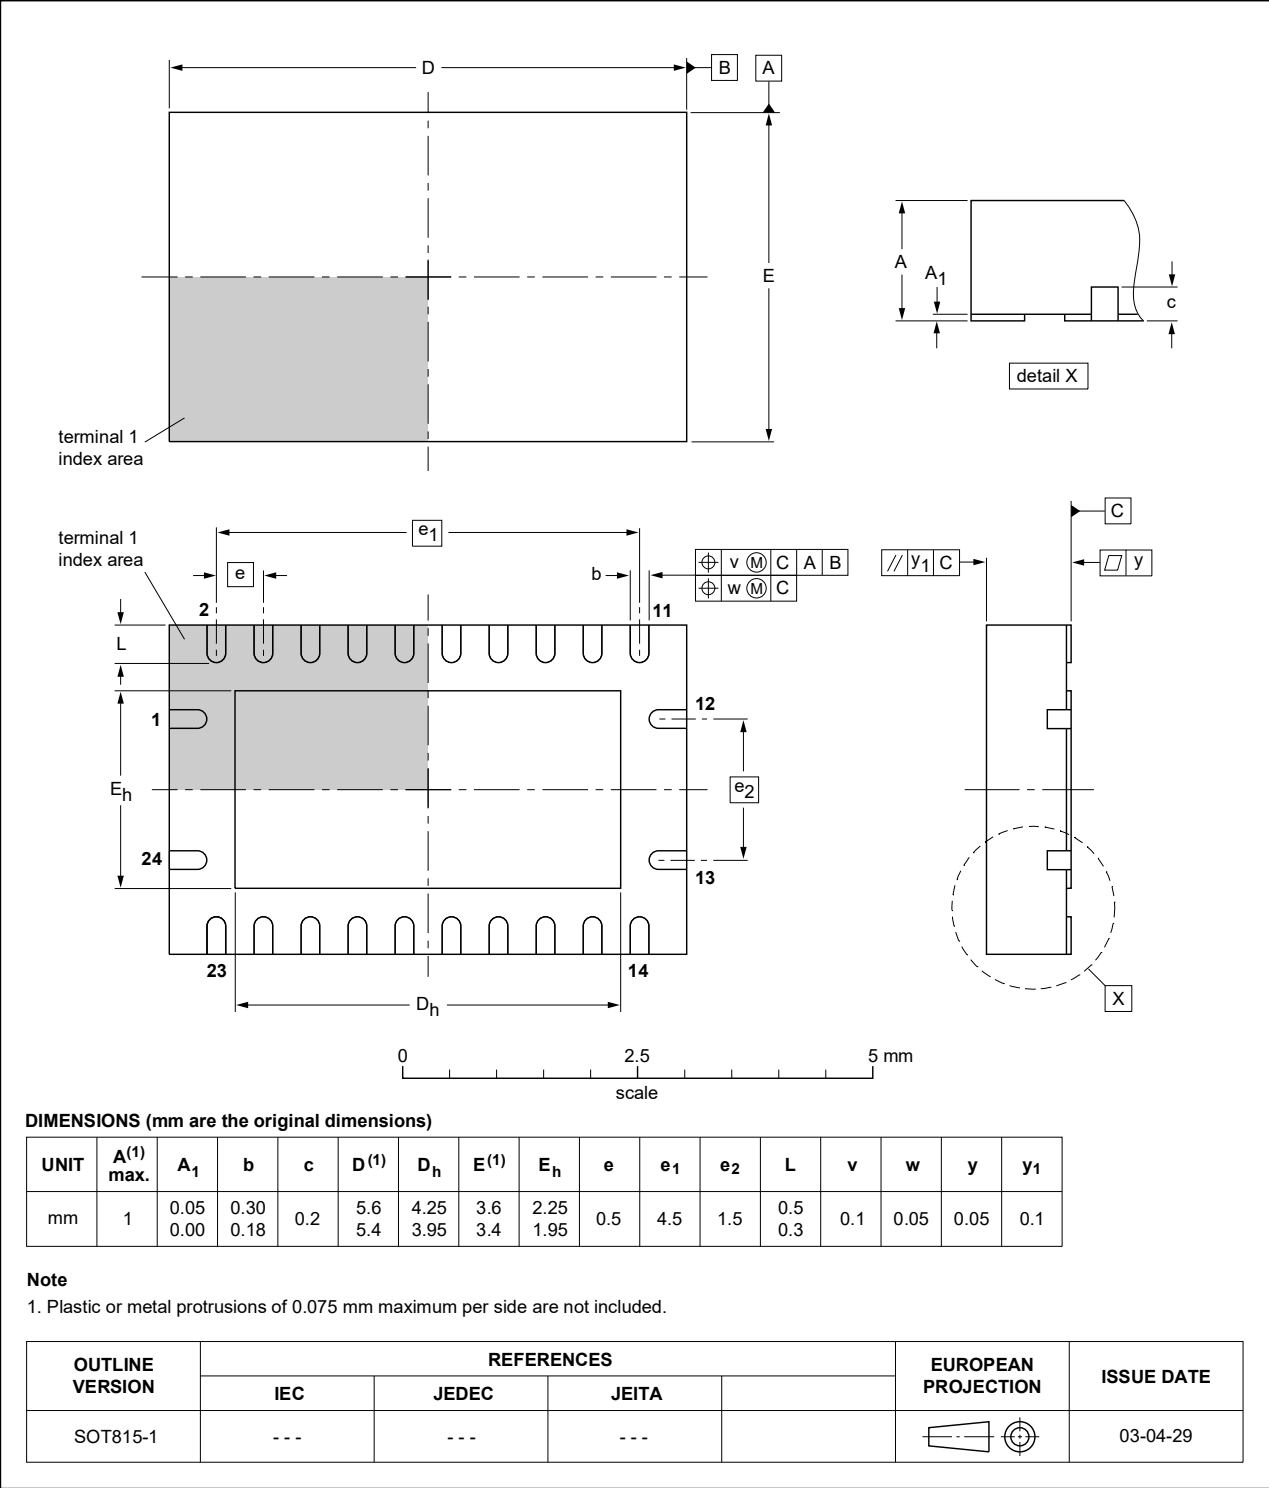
Package outline SOT815-1 (DHVQFN24)
